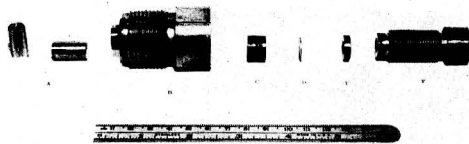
Specimen and rupture-disk assembly. A—Vent-plug specimen; B—assembly body; C—choke; D—disk; E—retaining ring; F—retainer plug.
